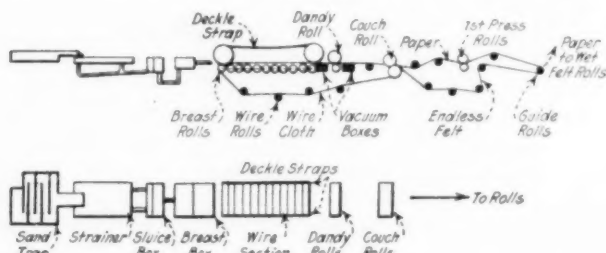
DIAGRAM OF THE WET END OF THE FOURDRINIER PAPER MACHINE
